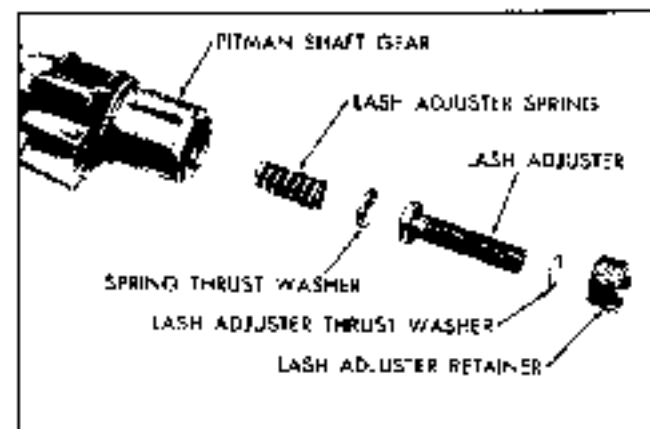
Parts in End of Pitman Shaft Gear - DO NOT DISASSEMBLE
